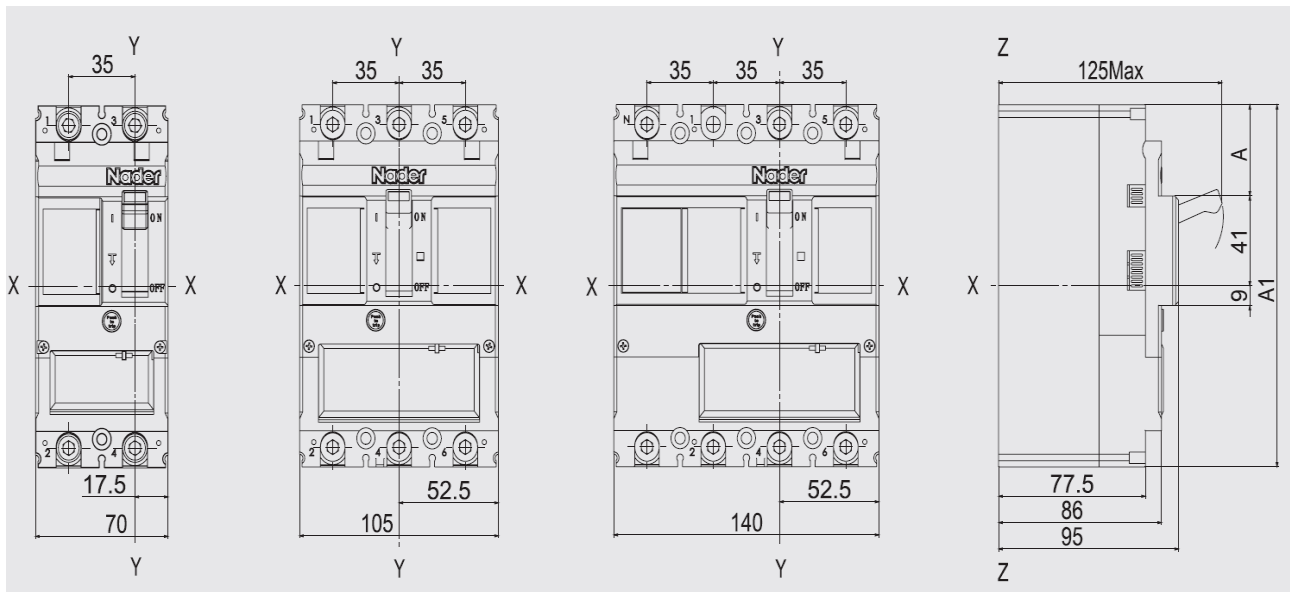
NDM5-250L/M/H 2P 3P 4P Outline dimension drawing of front board wiring products
